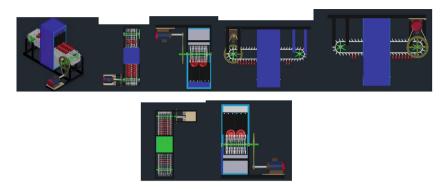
a. Detailed full drawing b. Top view c. Front view d. Right hand side e. Left hand side f. Bottom side g. Back view
